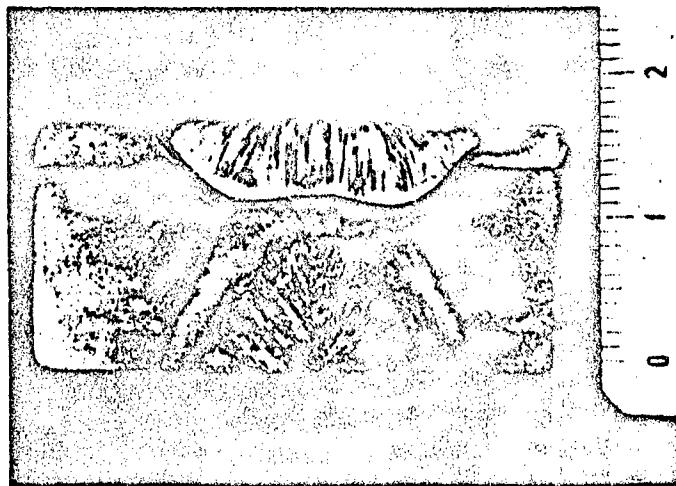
Macrograph of a Welded Joint Carried Out under Flux 58.
